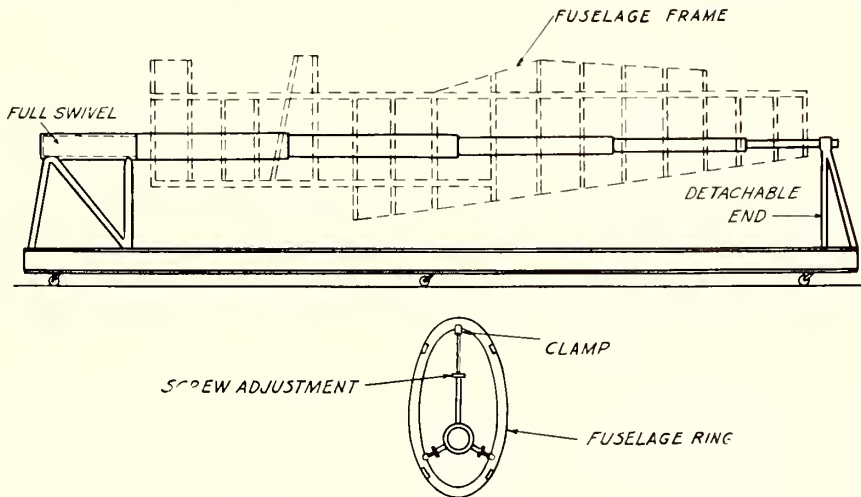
Internal type jig for assembling fuselage frames.
